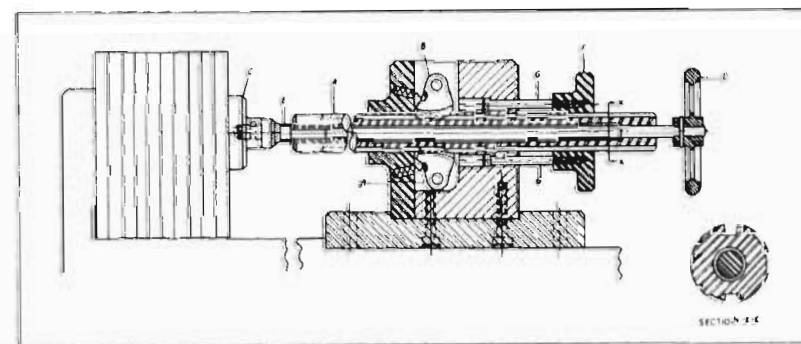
Ingenious arrangement on this fixture enables quick clamping of work despite large variations in work thickness.
